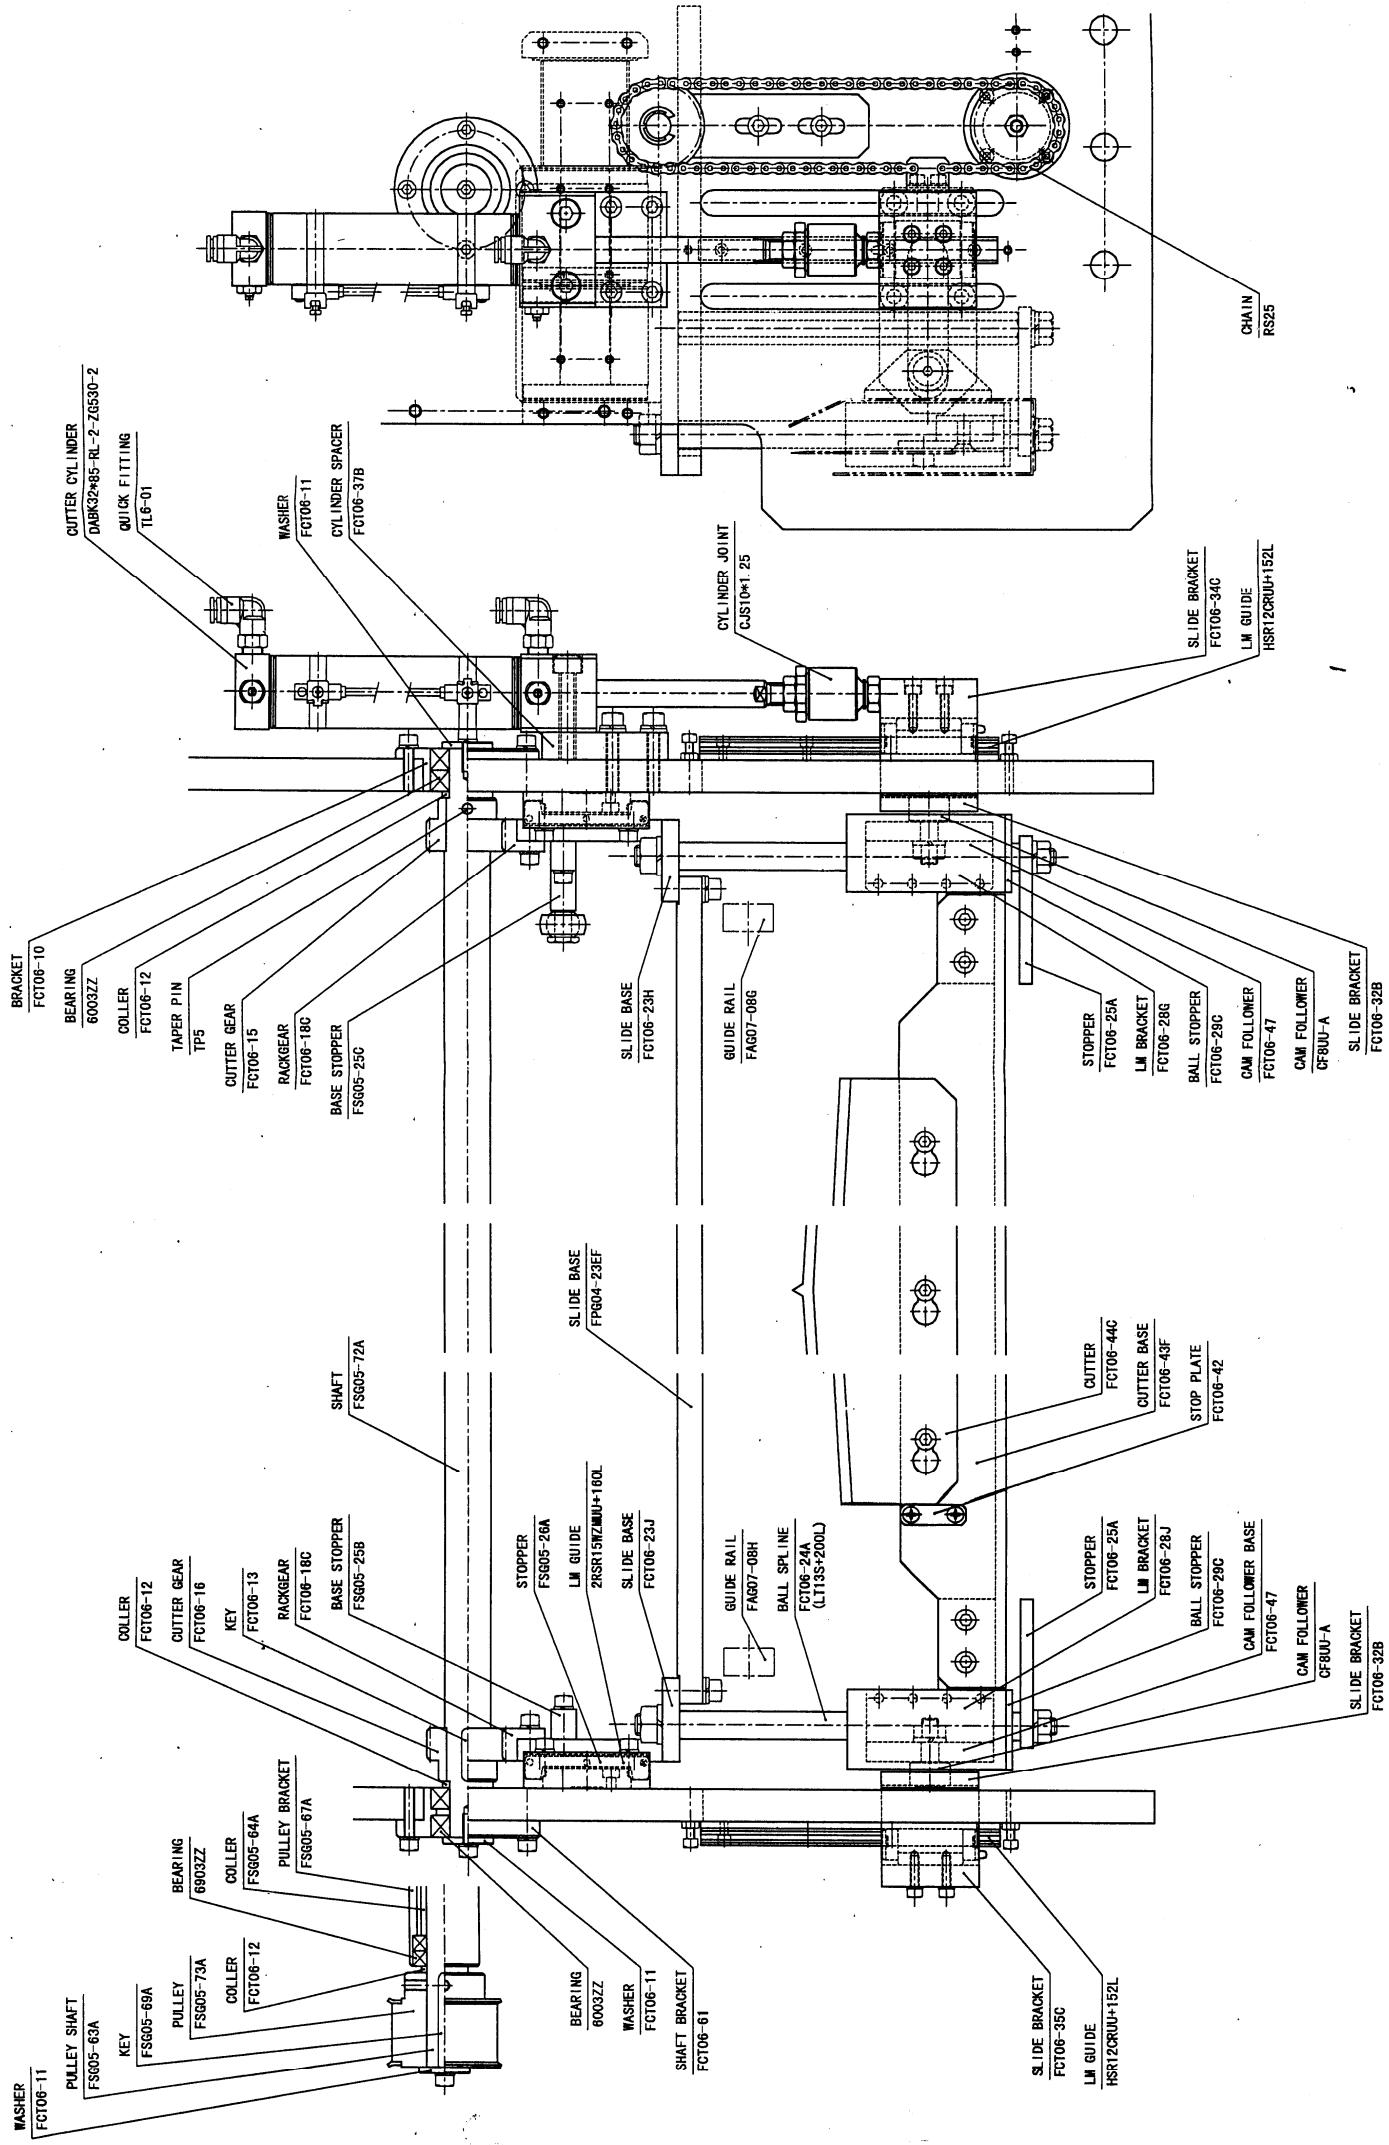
FILM CUTTER SECTION, BOTTOM SIDE
